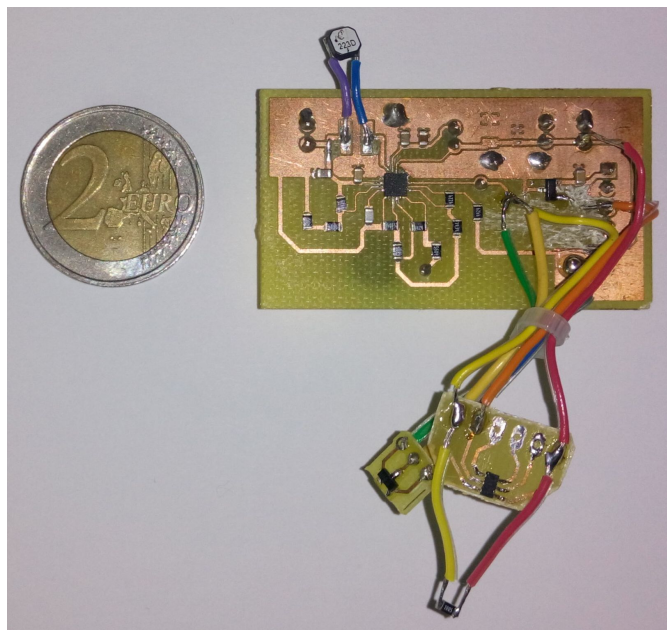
PCB of Ultra Low Power Boost Converter.
